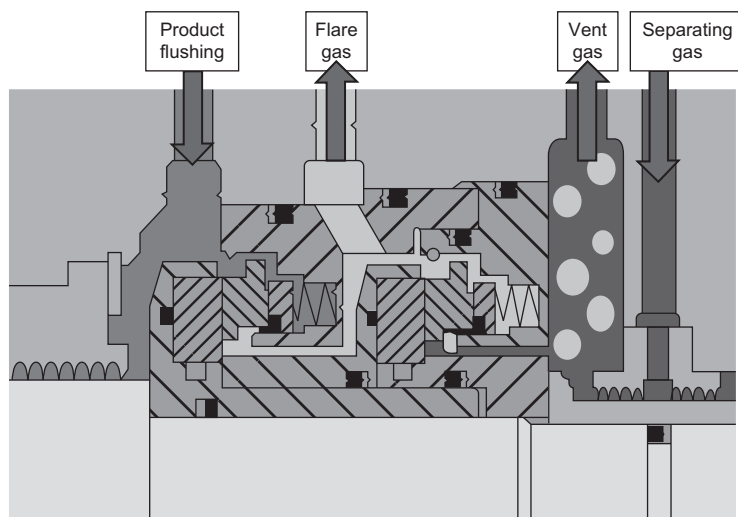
Tandem seal (courtesy Eagle Burgmann Germany GmbH & Co. KG).
